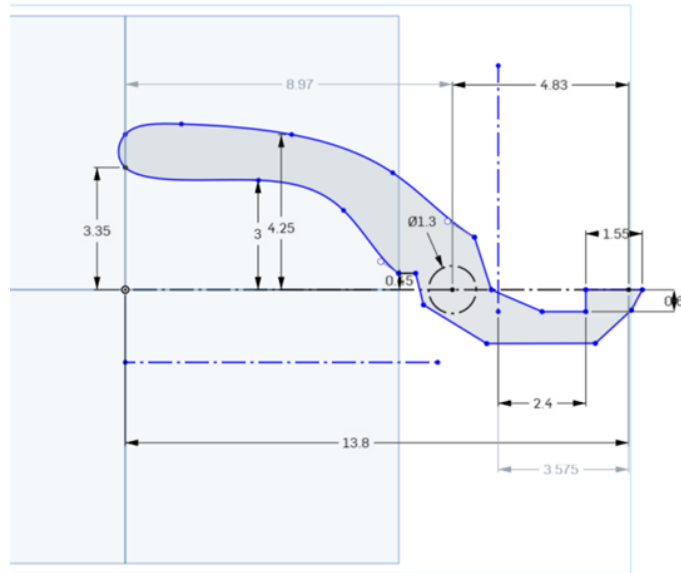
Handle Design Dimensions (cm) of Prototype 2
